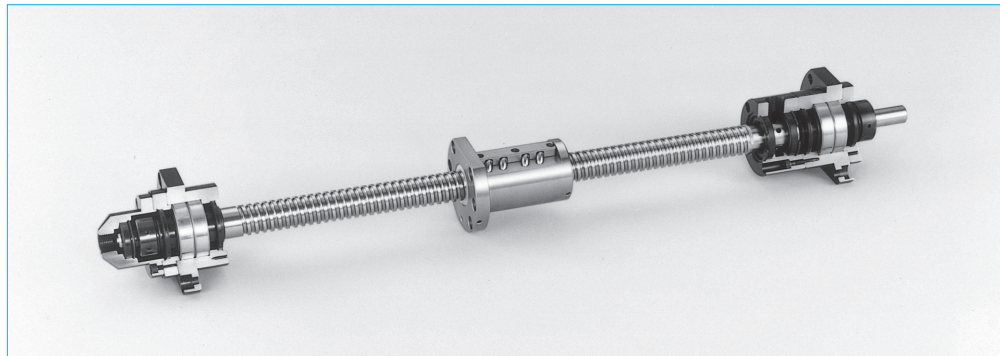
Hollow shaft ball screws for high-precision machine tools Page B528
